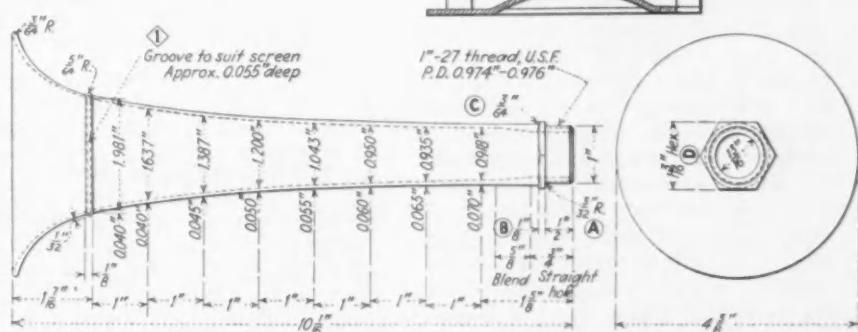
This die-cast horn, produced, of course, in one piece, took the place of two stamped or drawn parts and a screw-machine part which were formerly assembled by soldering at a considerably higher cost. (Drawing, courtesy Schultz Die Casting Co.)
